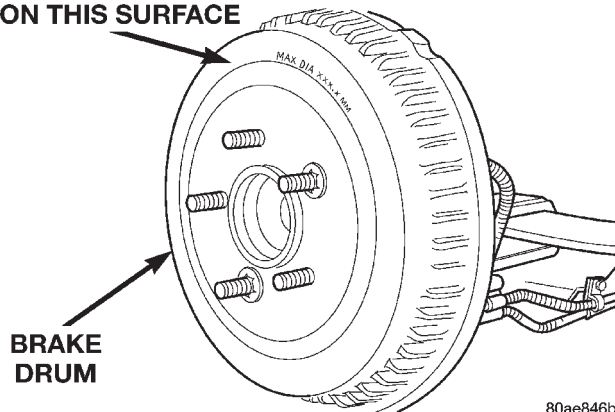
Rear Brake Drum Maximum Diameter Identification
